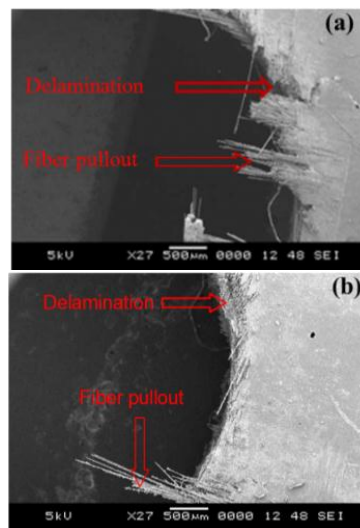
SEM micrographs showing surface morphology of the drilled hole using (a) HSS drill and (b) solid carbide drill
